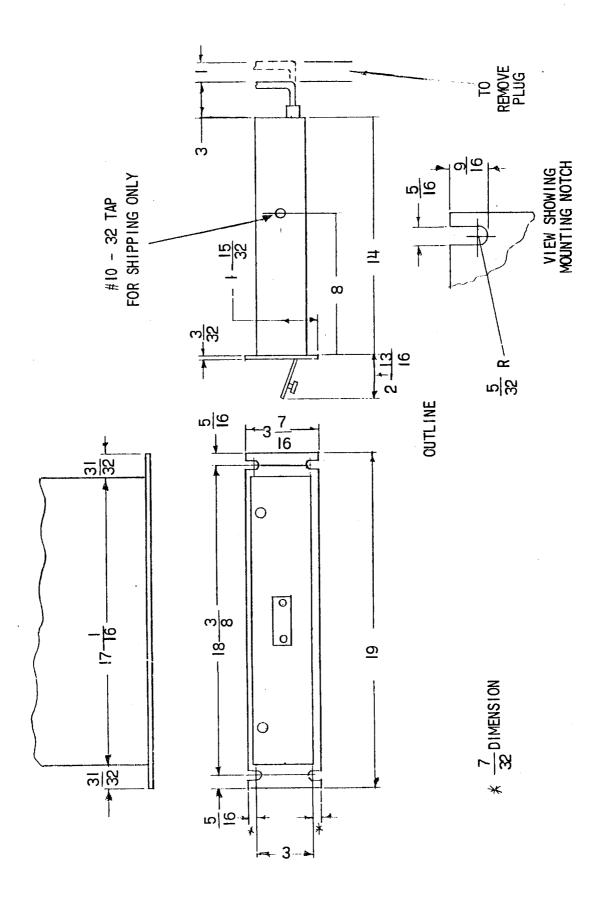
(0227A2036) Outline and Mounting Dimensions for the Type SLAT61N Relay
